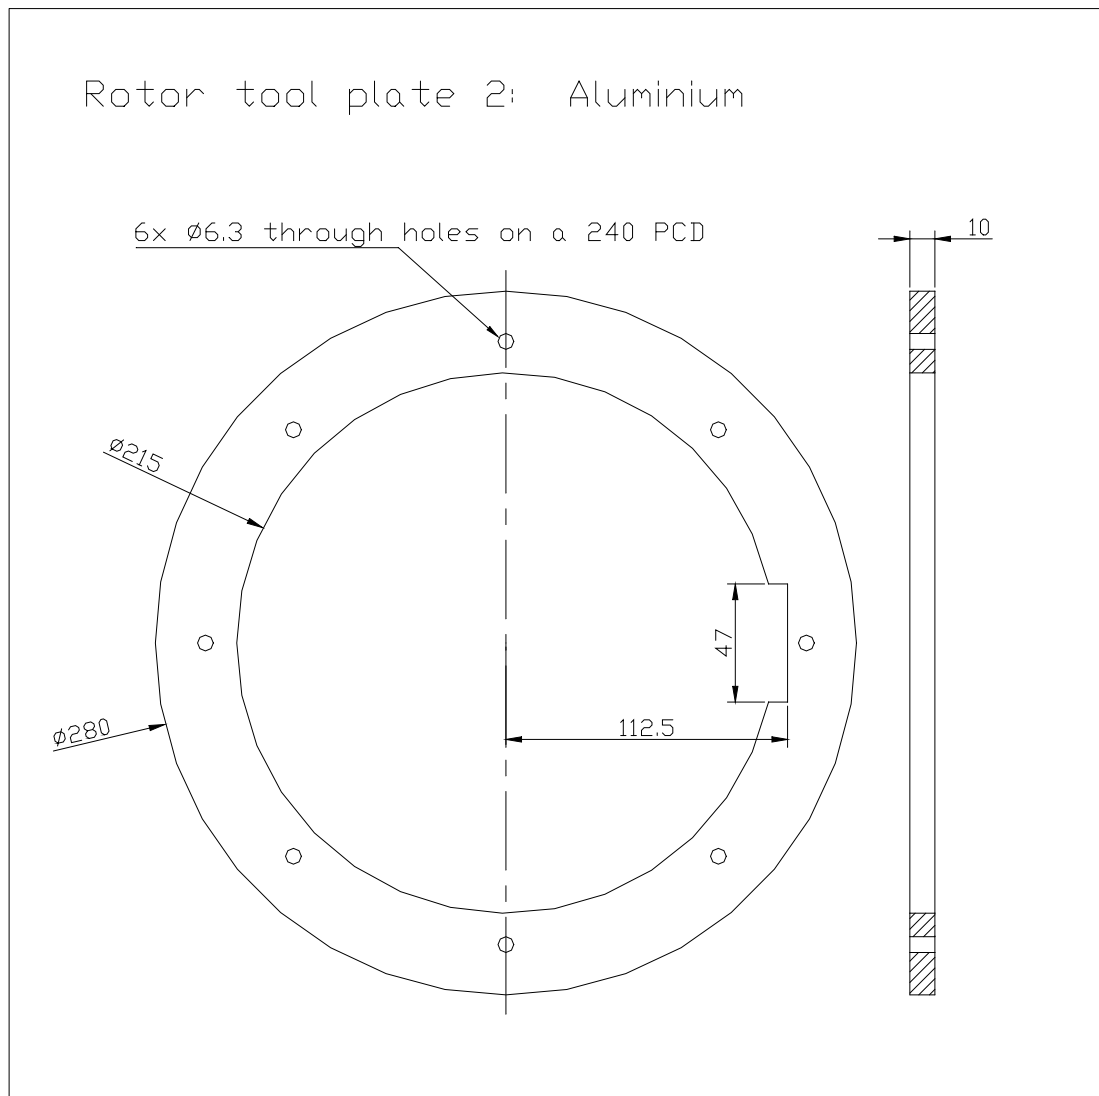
Rotor tool plate 2 for exterior rotor alignment and assembly clamping
